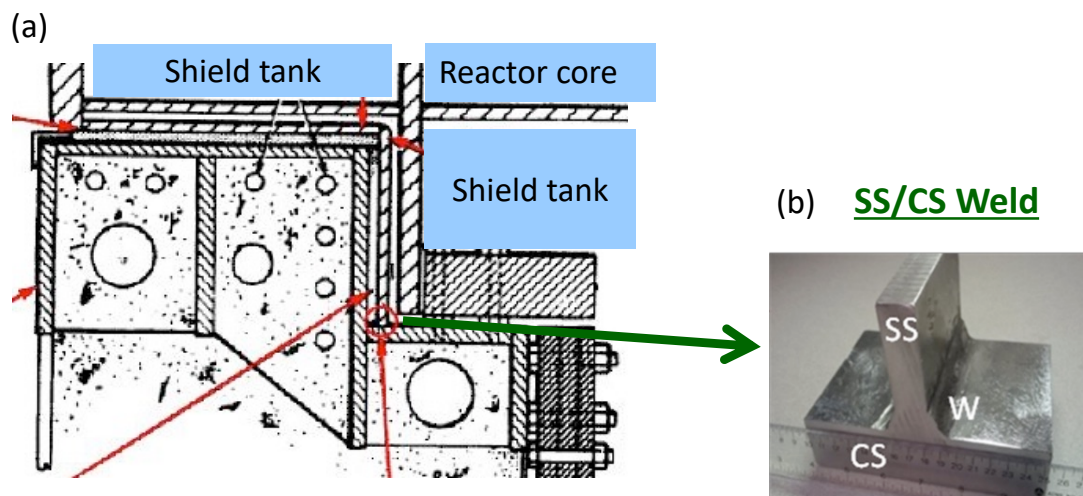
(a) Schematic of the calandria tank assembly and its supporting structures in a CANDU reactor. The red circle indicates the location of the carbon steel (CS) and stainless steel (SS) weld joint (b) a SS-CS weld block supplied by Ontario Power Generation (OPG).
